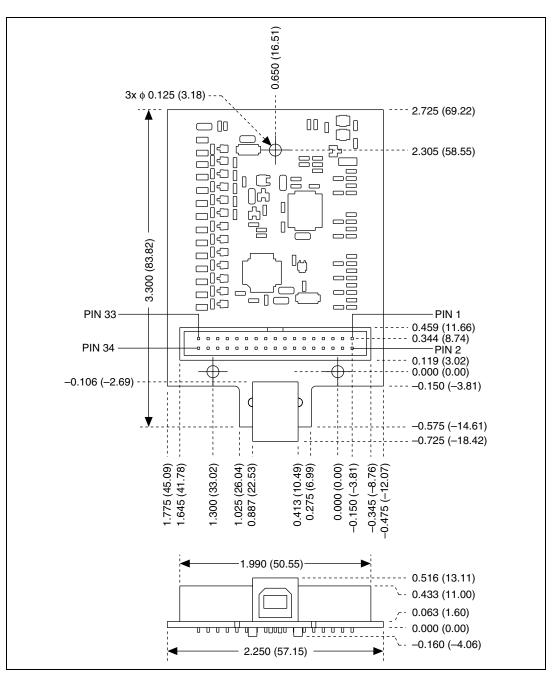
shows the USB-6008/6009 OEM device dimensions.
